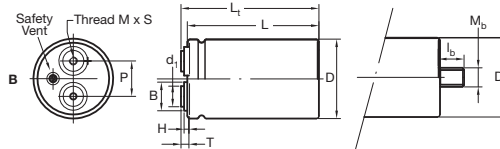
B: High current M6 disc: Screw terminal (ST) and screw terminal bolt nut (STB)
